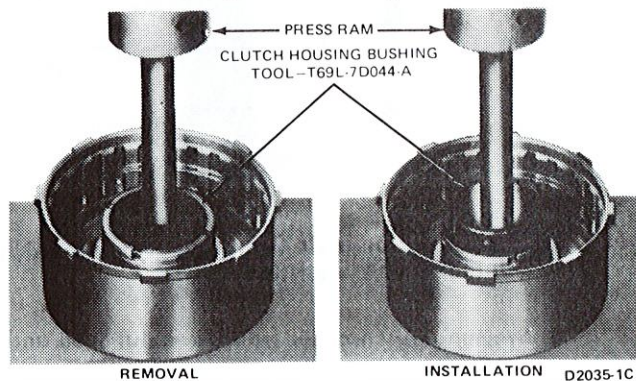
Replacing Reverse-High Clutch Rear Bushing
